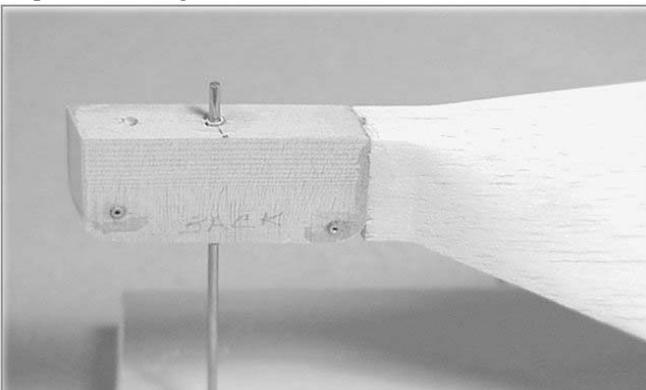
Blade has been temporarily glued to hub for alignment in the fixture.
